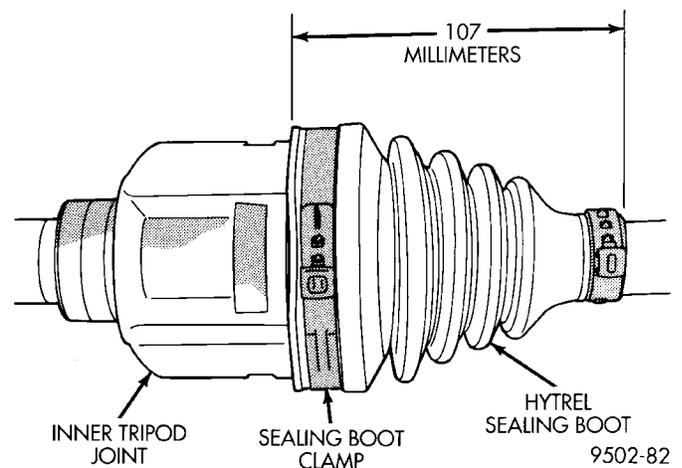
Sealing Boot End to End Length with Hytrel Boot
